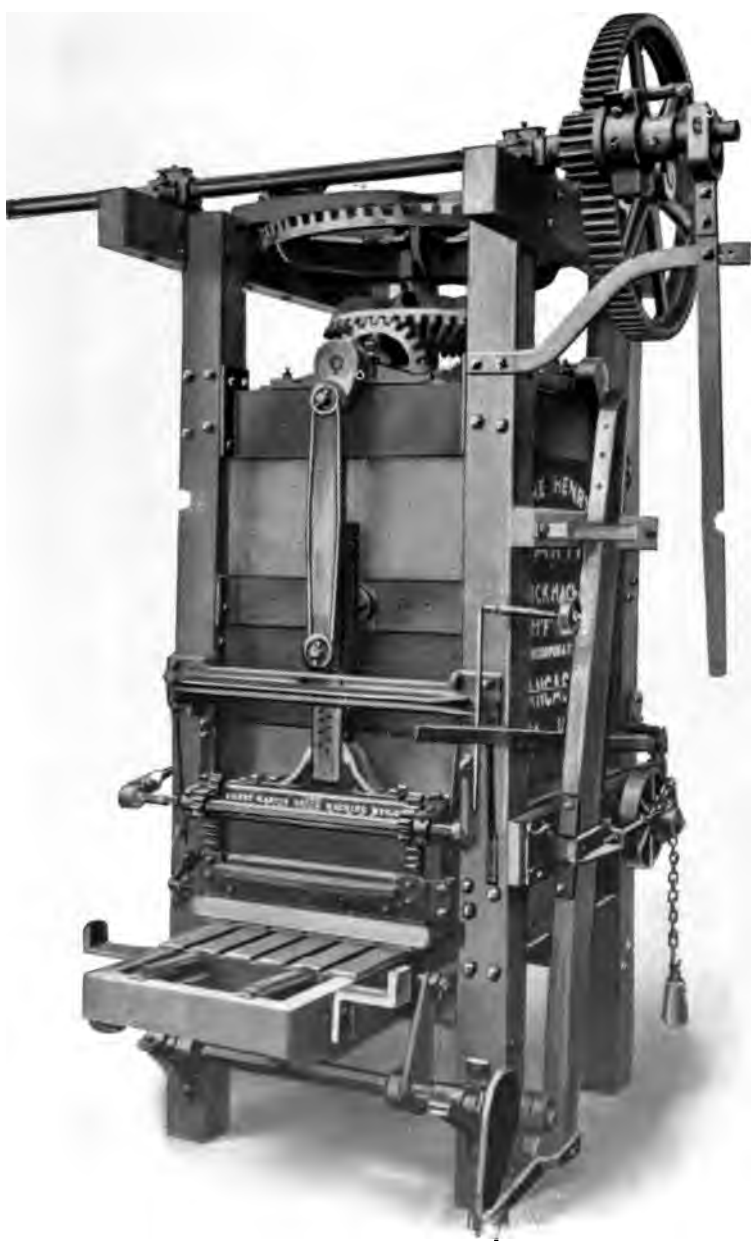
PLATE IX.—HENRY MARTIN "B" BRICK MACHINE.
